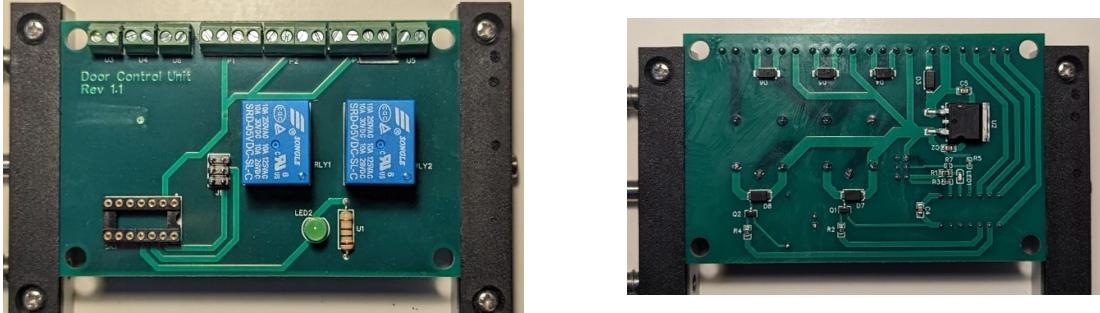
Door Control Unit PCB top (left) and bottom (right) view
